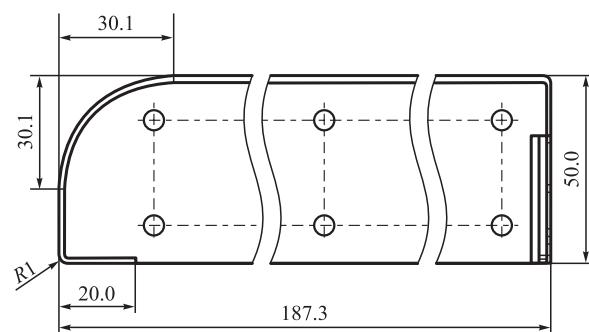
Longitudinal section of the sterilizer door bumper drawing shown in Fig. 6
